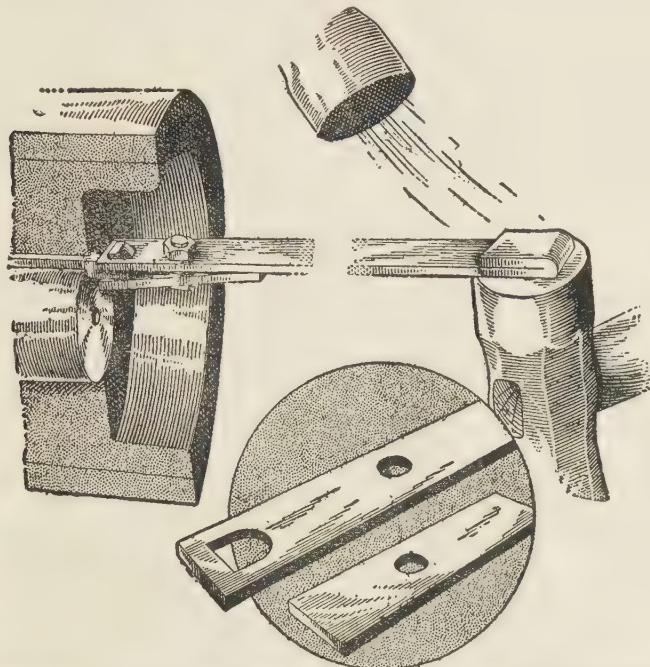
CRACKED CYLINDER. FIG. 2. HOW NEW CYLINDER WAS SHORTENED AND JOINT REINFORCED
